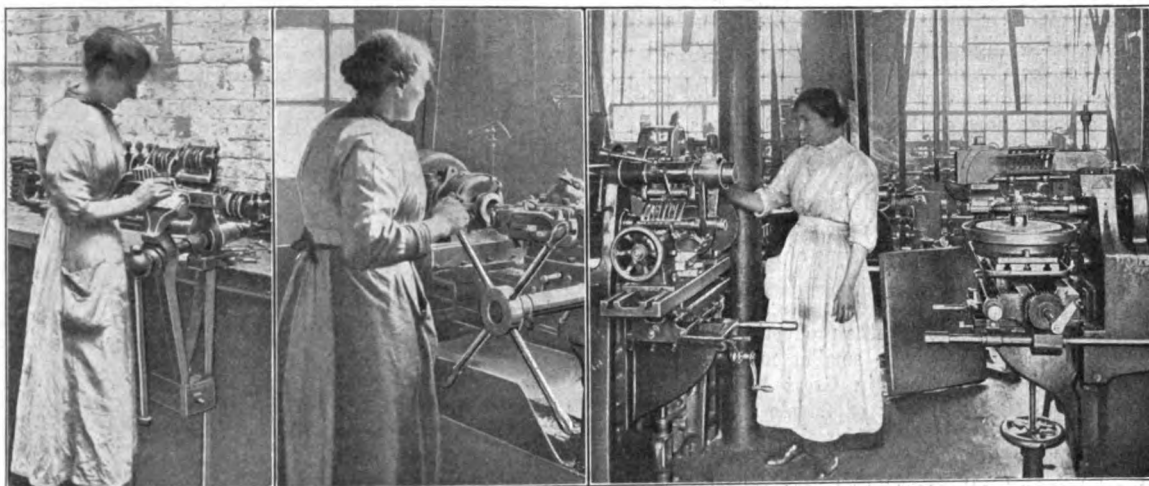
FITTING GRINDER PARTS AND GRADUATING SCALES
